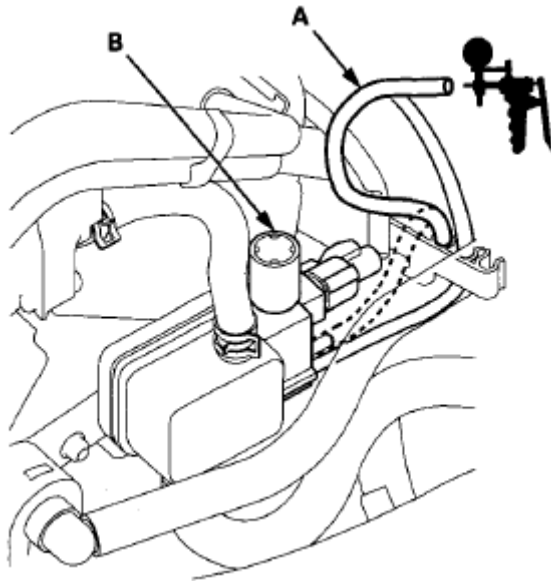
Identifying Vacuum Hose And Engine Mount Control Solenoid Valve
